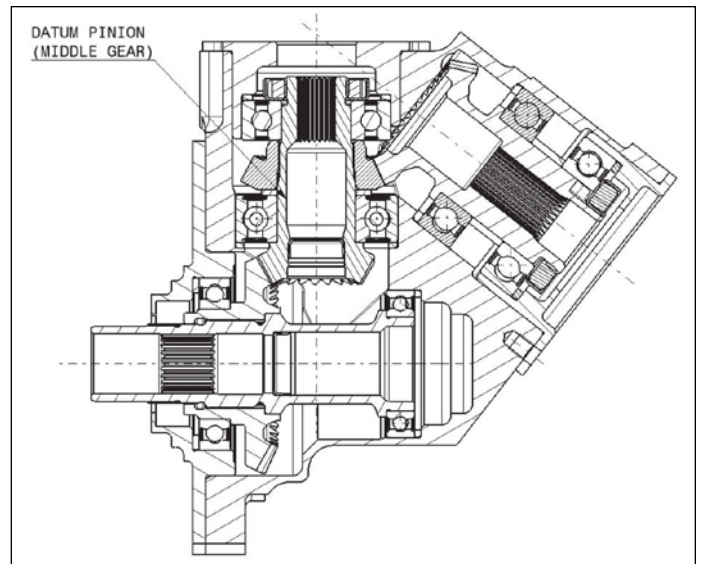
Section of a gearbox; the fitter should start with the center gear as the datum pinion.
